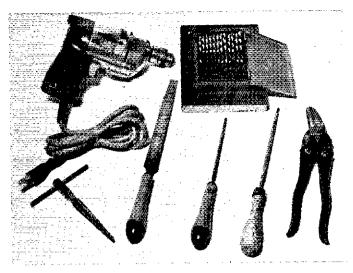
A 3/8-inch drill capable of clamping very small bits is a desirable tool if you plan to work on pc boards. Also shown below the drill and bits are (I-r) reamer, files and sheet-metal shears.
